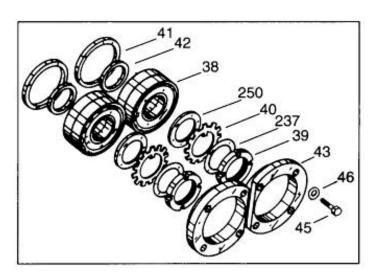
Development view of the 125-250 thrust bearing * 250 does not have thrust bearing outer race spacer (41).
